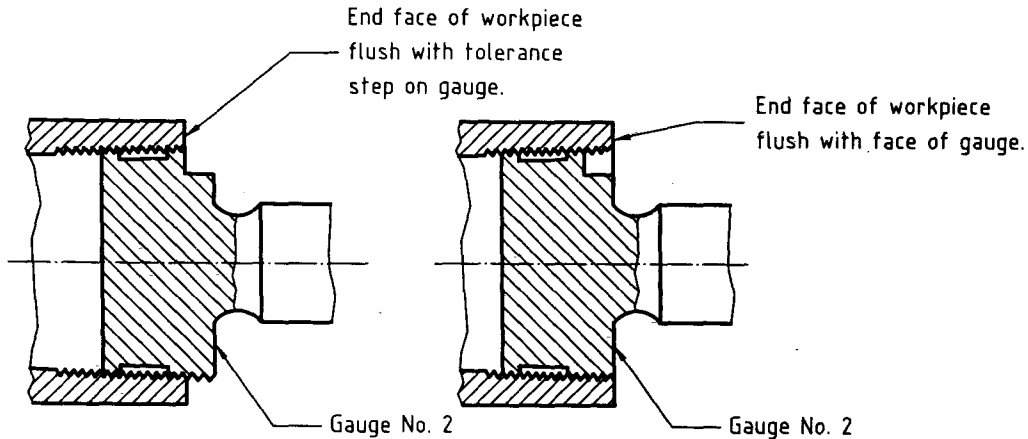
Checking of internal taper (Rc) and parallel (Rp) threads — Stage 2
